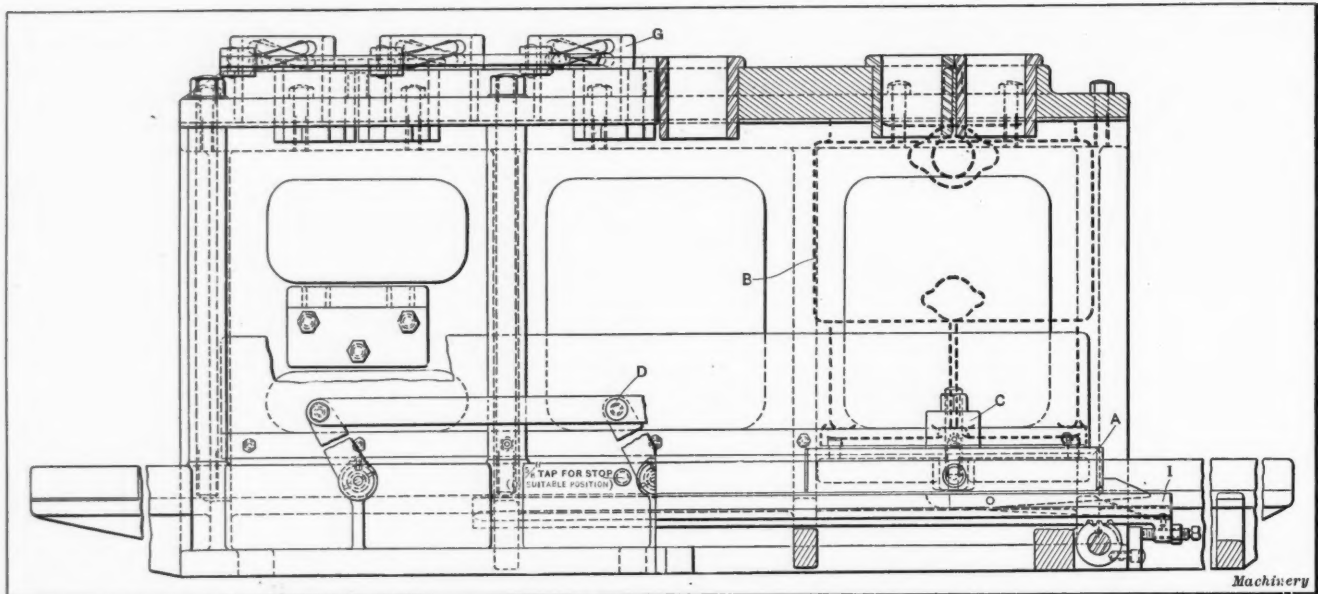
Front Elevation of Progressive Type of Drilling, Rough-boring and Finish-reaming Jig used on the Machine shown in Fig. 14
